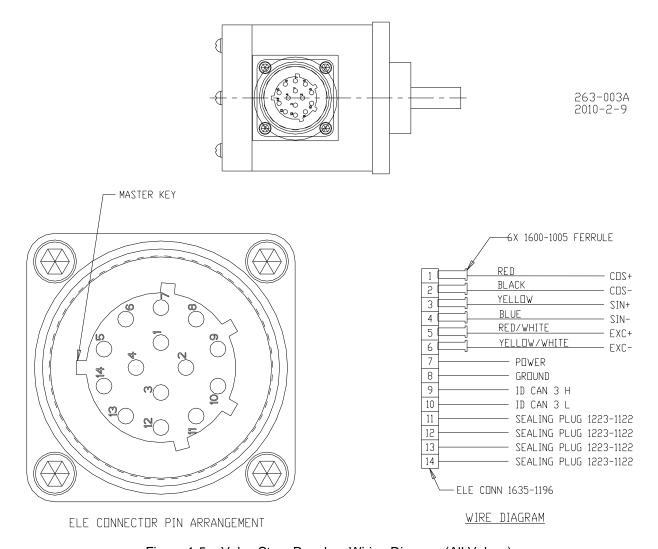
Valve Stem Resolver Wiring Diagram (All Valves)
